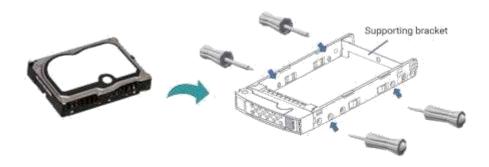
Align a Disk Drive & Install into a Tray (SFF-to-SFF)
